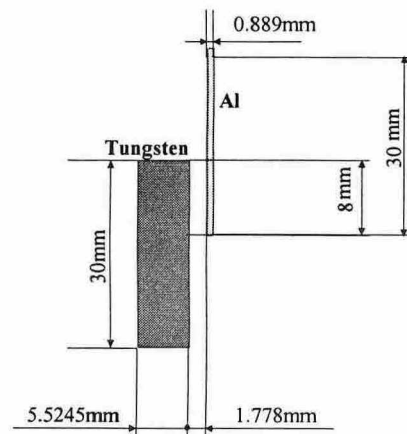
Analysis model setup for Electromagnetic Impulse welding.
